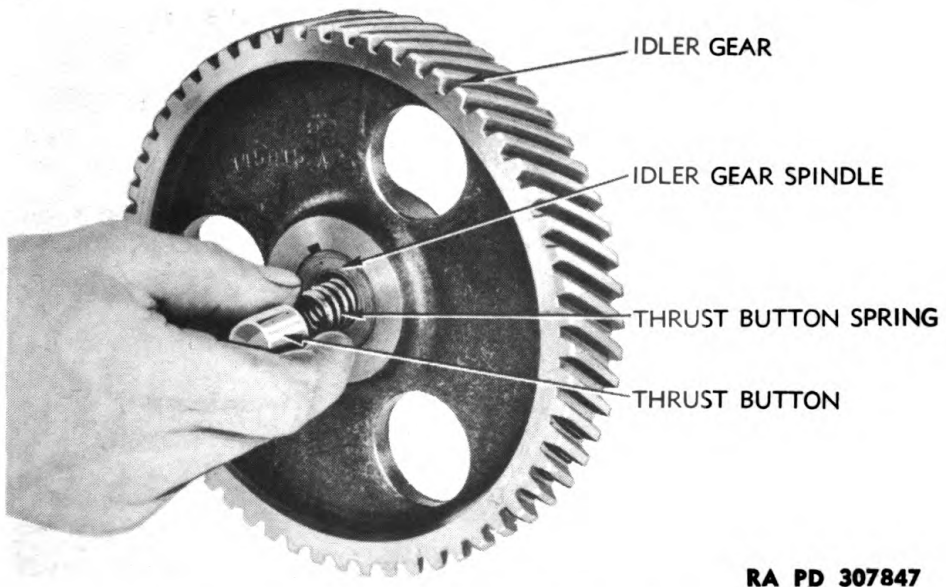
Removing Thrust Button and Spring From Idler Gear
